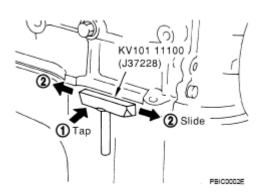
Inserting Tap Seal Cutter And Slide By Tapping On Side
